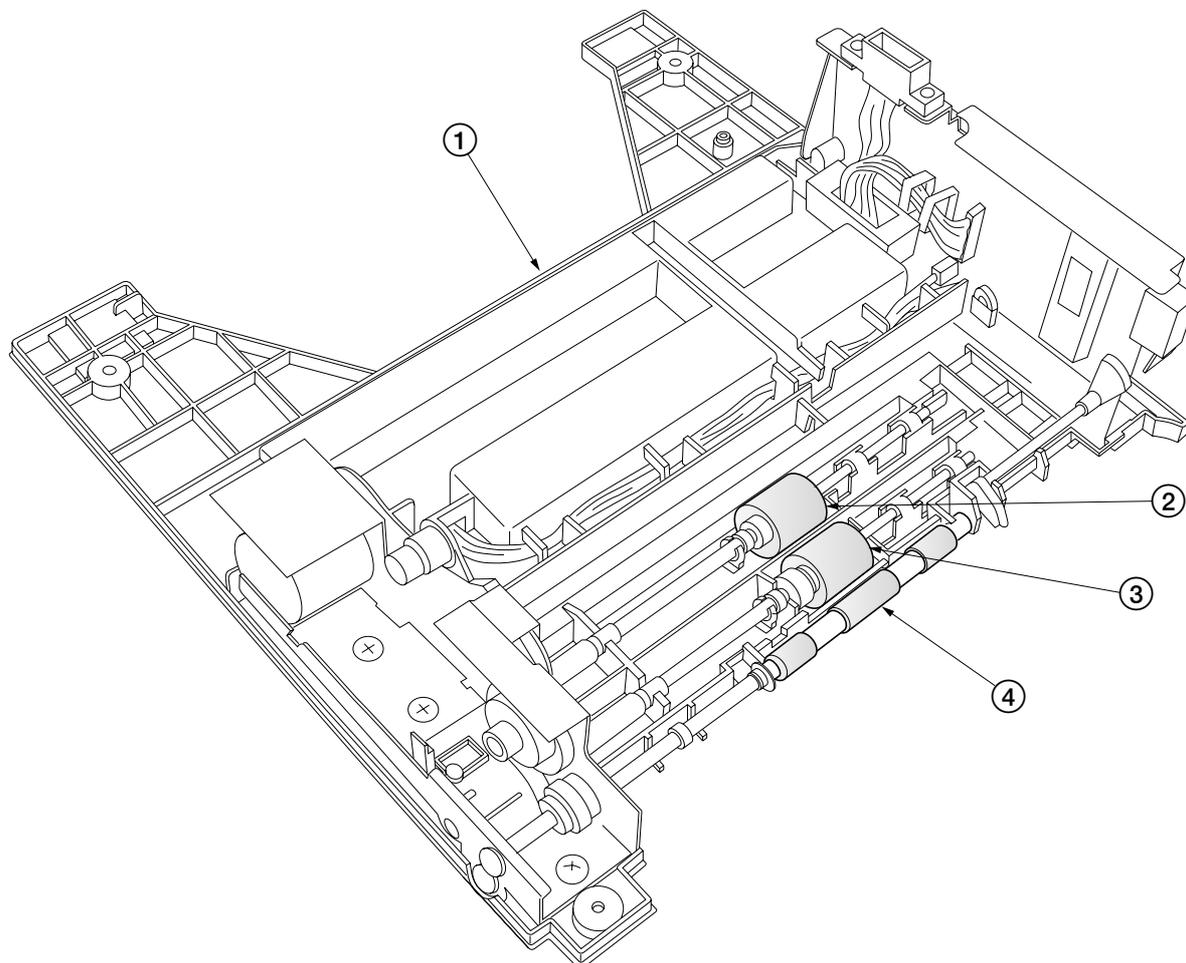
Cleaning the pickup roller, feed roller and conveying roller
